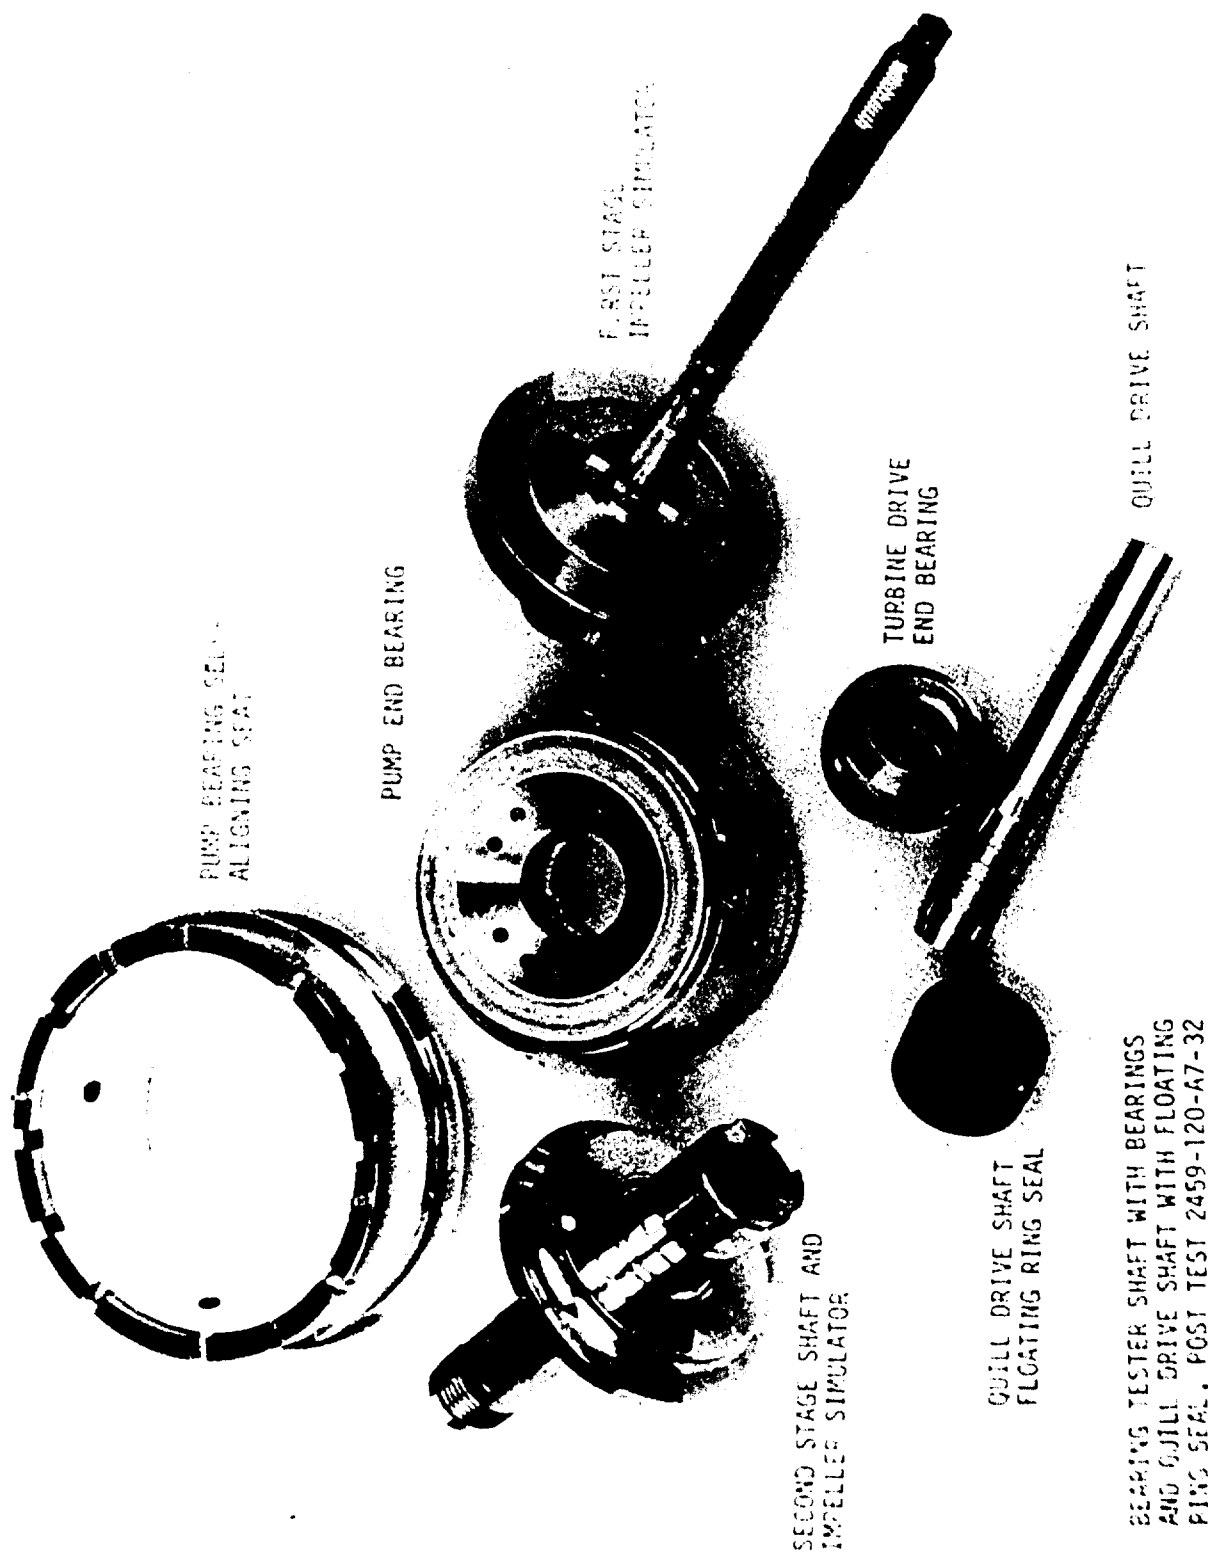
Bearing Tester Shaft and Quill Drive Shaft With Floating Ring Seal, Post Test 2459-120-A7-32
